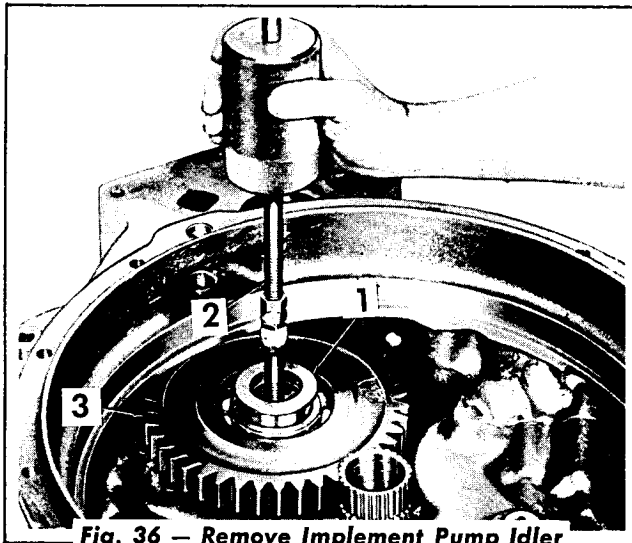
Remove Implement Pump Idler Gear Spindle
